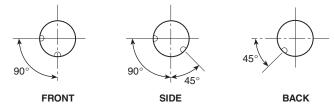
(b) Cross-sectional view of each side of square gas burner.
